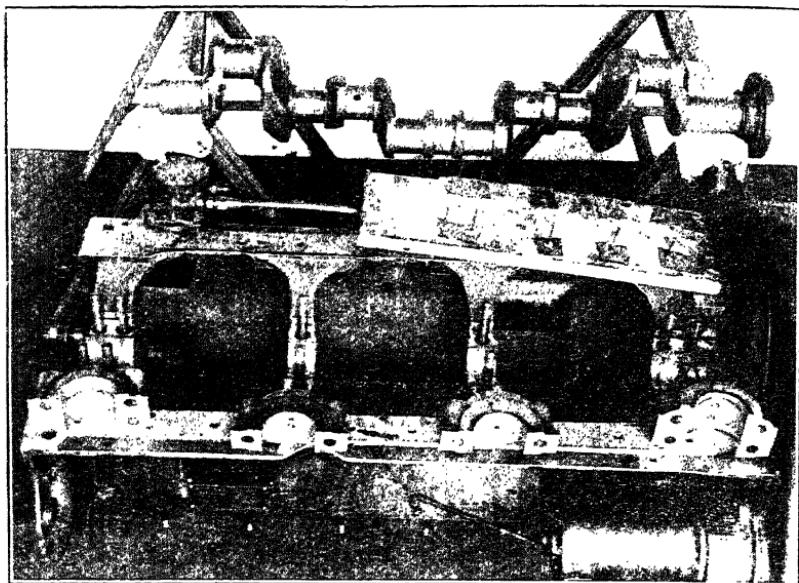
The Shim Board Is Used To Keep the Shims in Position When Testing Main Bearings
